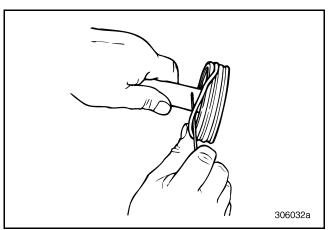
Installing O-Ring in Second/Lower Groove on Piston
